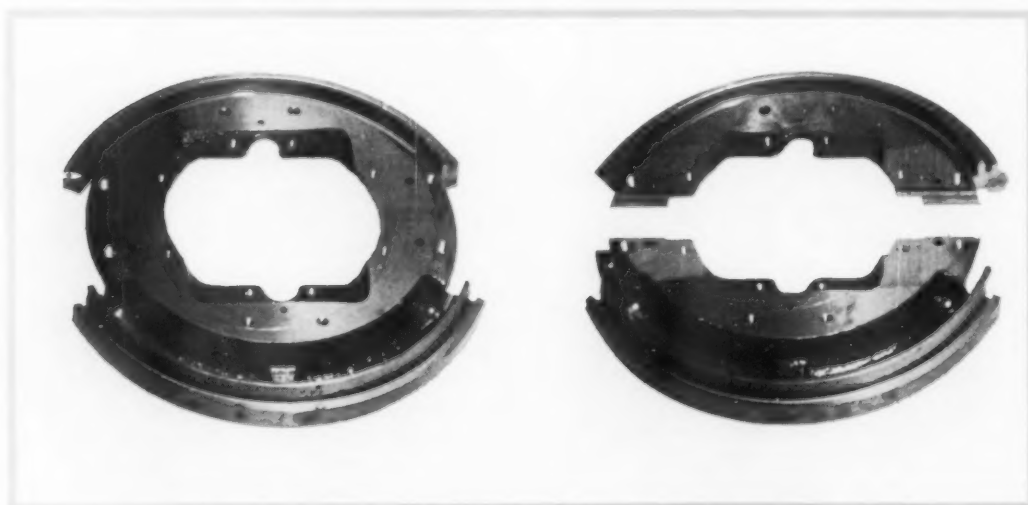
Partially machined part (left) is form milled and parted on one machine. A four-degree assembly clearance is also machined simultaneously.
